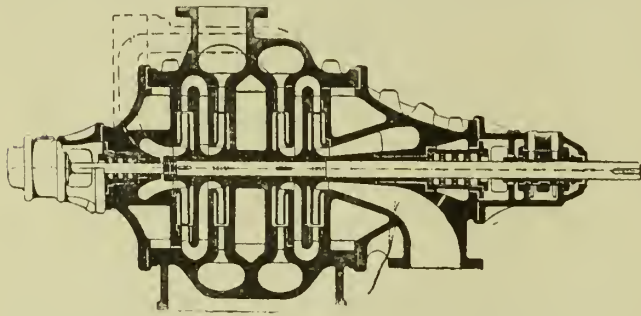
Continental Pump. "Cylindrical-casing" Construction.
